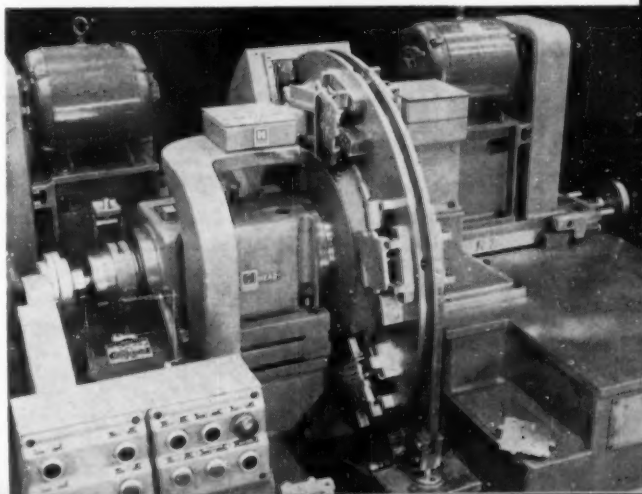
Facing a valve body of aluminum to 20-microinch rms, finish on constant travel machine.
